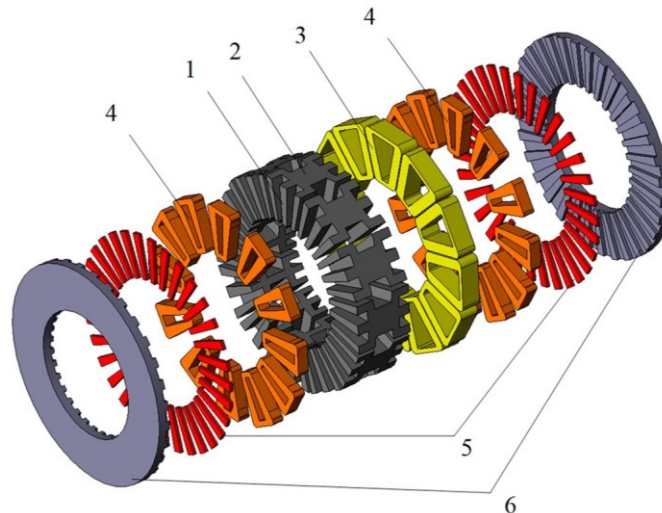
Exploded view of the proposed DR-HEAFPMVM. 1—Stator split-tooth, 2—stator maintooth, 3—armature windings, 4—DC excitation windings, 5—PMs, and 6—rotor back iron [59]
